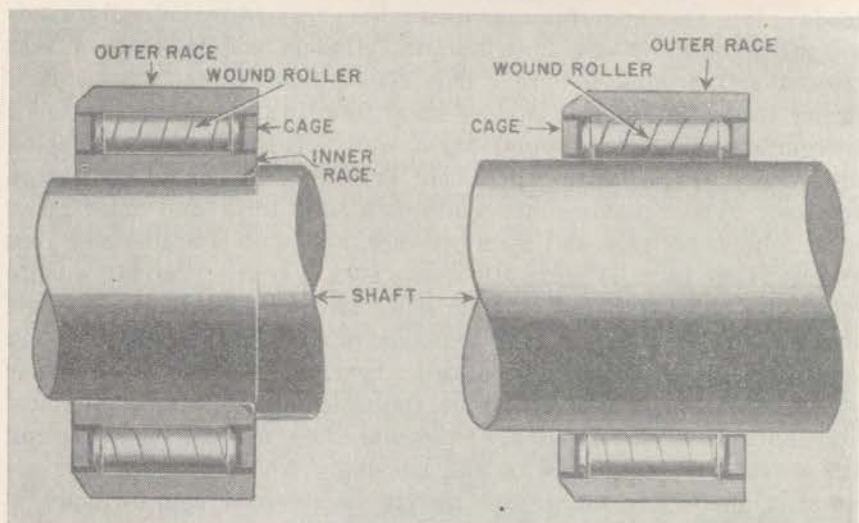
Wound roller bearing with solid outer and inner races and with no inner race.
